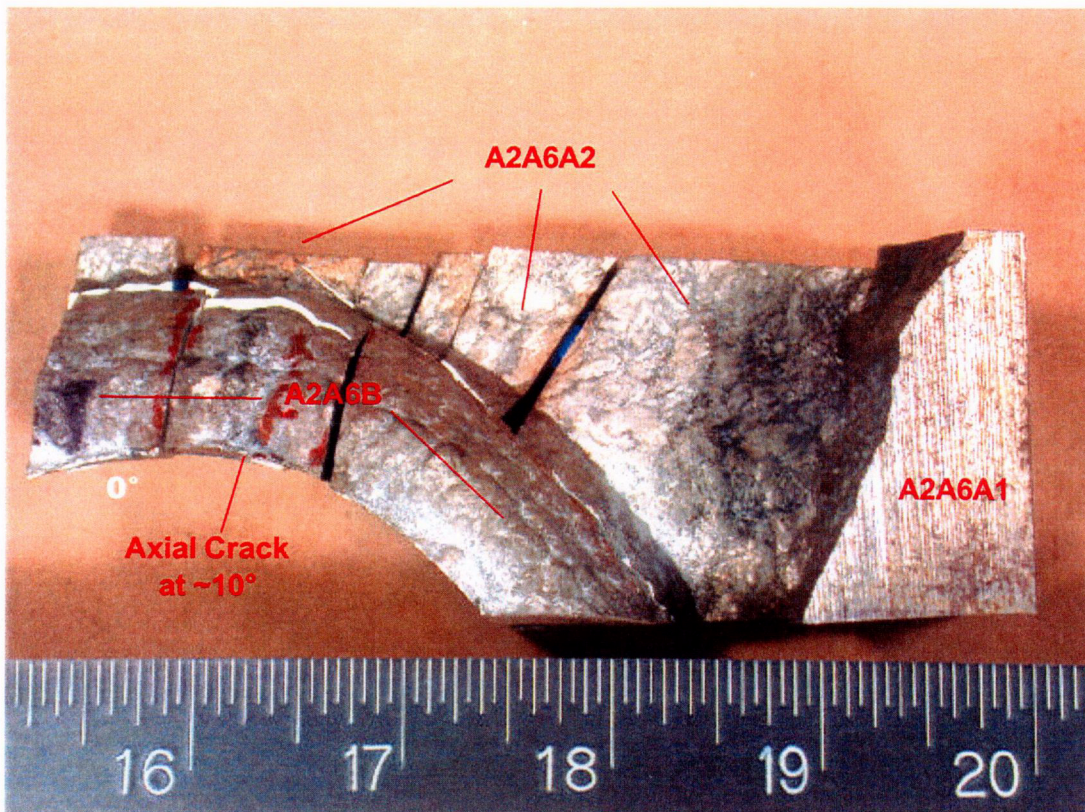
Piece A2A6 was first sectioned into Pieces A2A6A and A2A6B. Piece A2A6A was further sectioned into Pieces A2A6A1 and A2A6A2. Both cuts were made on the same plane, parallel to the paper. The first cut line is partially visible; Piece A2A6B is the upper portion of the weld. The second cut line between Pieces A2A6A1 and A2A6A2 is obscured by Piece A2A6A1.
